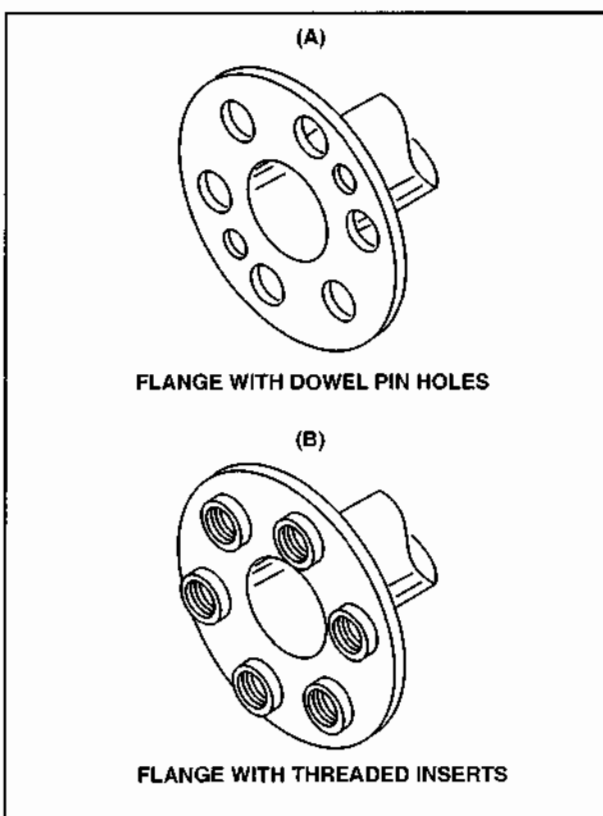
(A) On a flanged crankshaft with dowel pin holes, the propeller is mounted to the crankshaft with bolts and nuts. The dowel pin holes are often arranged so that the propeller can be mounted in only one position. (B) Many installations use threaded inserts pressed into the crankshaft to eliminate the need for nuts.
